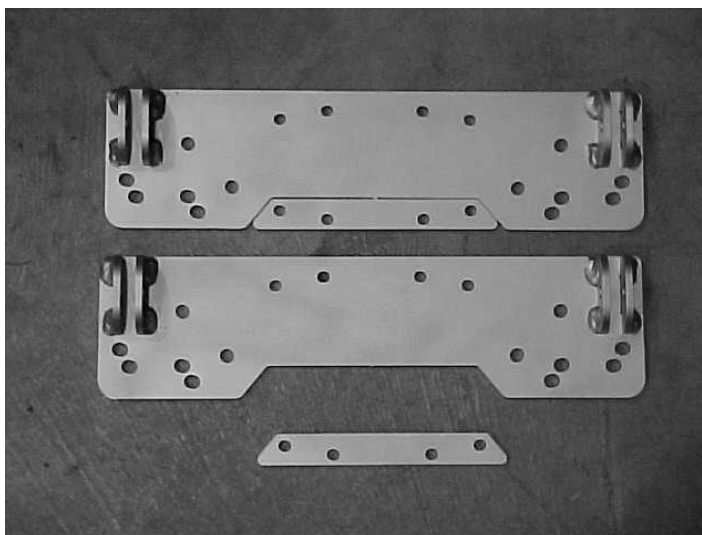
REMOVING THE "BREAK-OFF" PIECE
